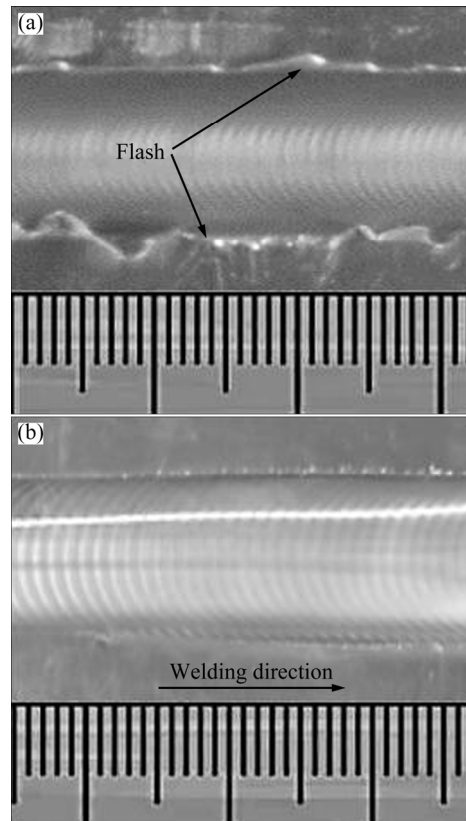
Surface appearance of FSW welds: (a) CFSW; (b) RCFSW
